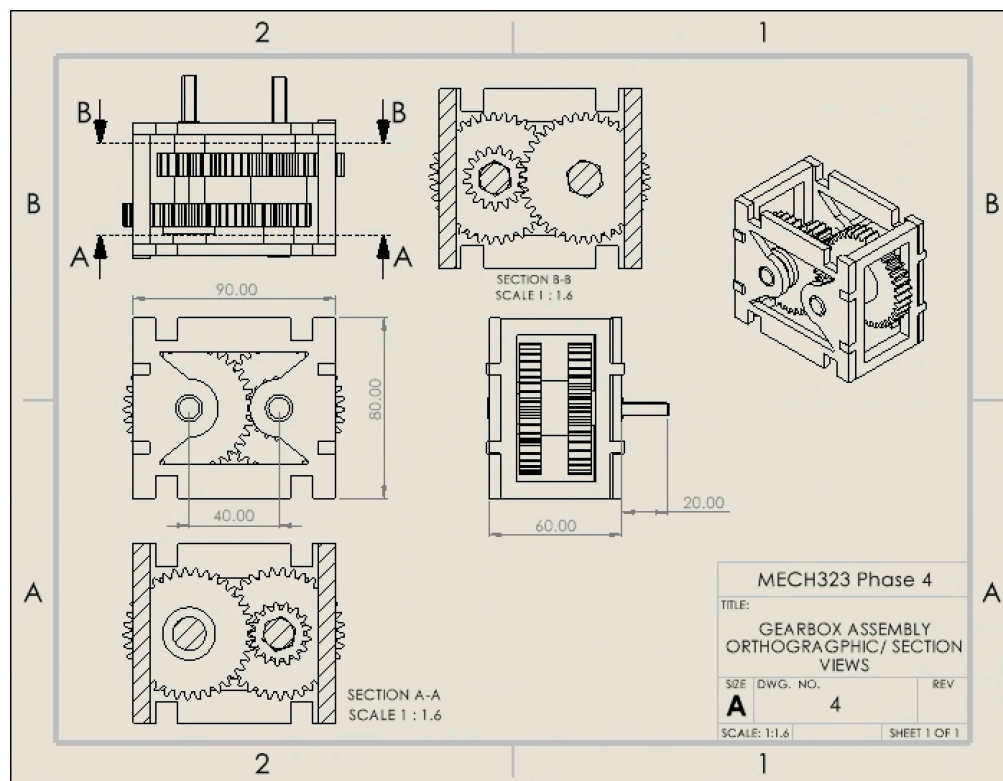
Orthographic, section, and isometric views of the gearbox with all relevant design criteria shown. Such as design parameters, fully assembled housing dimensions and d-shaft protrusion distance.
